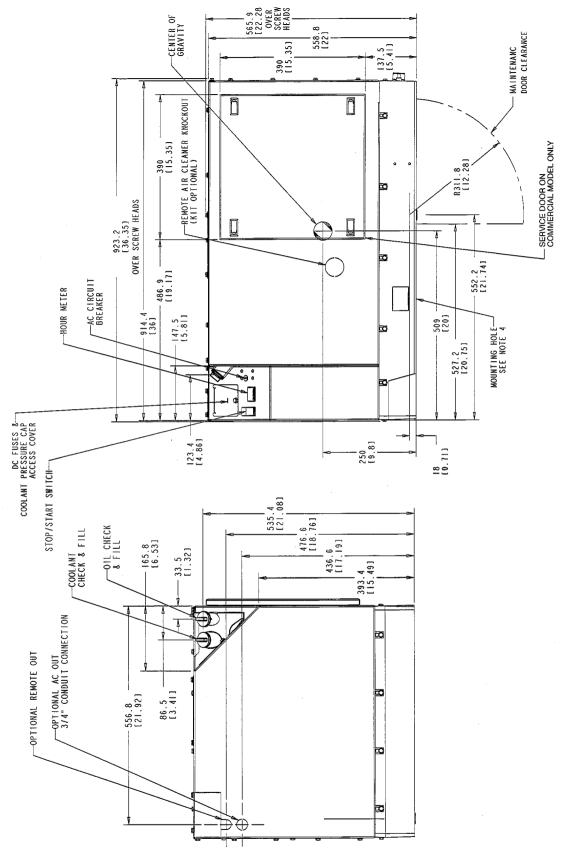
OUTLINE DRAWING—FRONT AND LEFT SIDES
